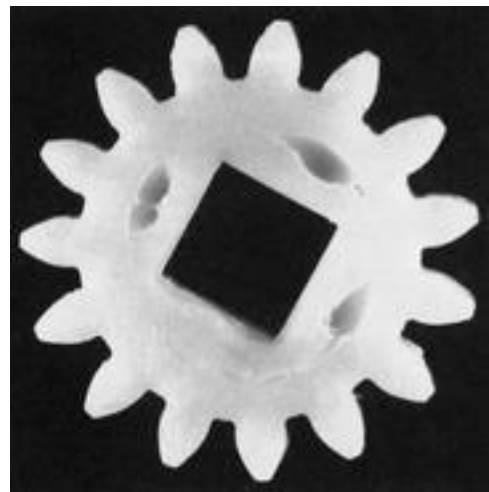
Section through a molded nylon gear showing three large shrinkage holes
